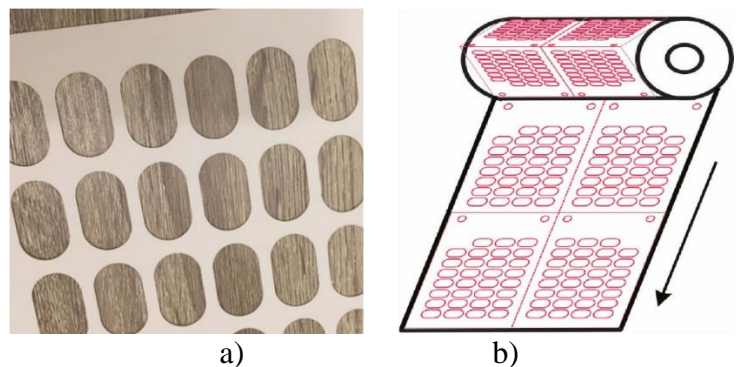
Final product: a) cardboard sample with laminated composition and b) sketch of a finished roll.
